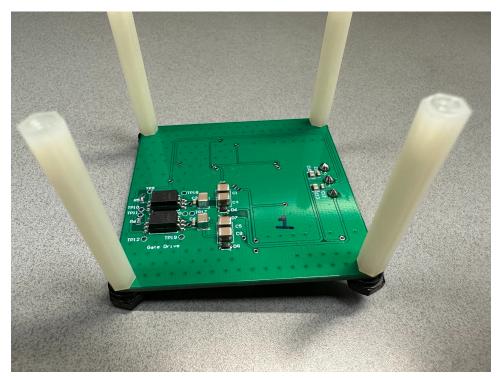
2S NCH+PCH Balancer PCB Bottom View
